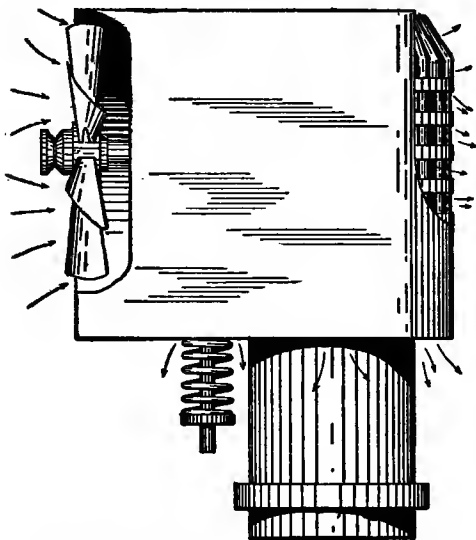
FORCED-DRAFT COOLING SYSTEM.
